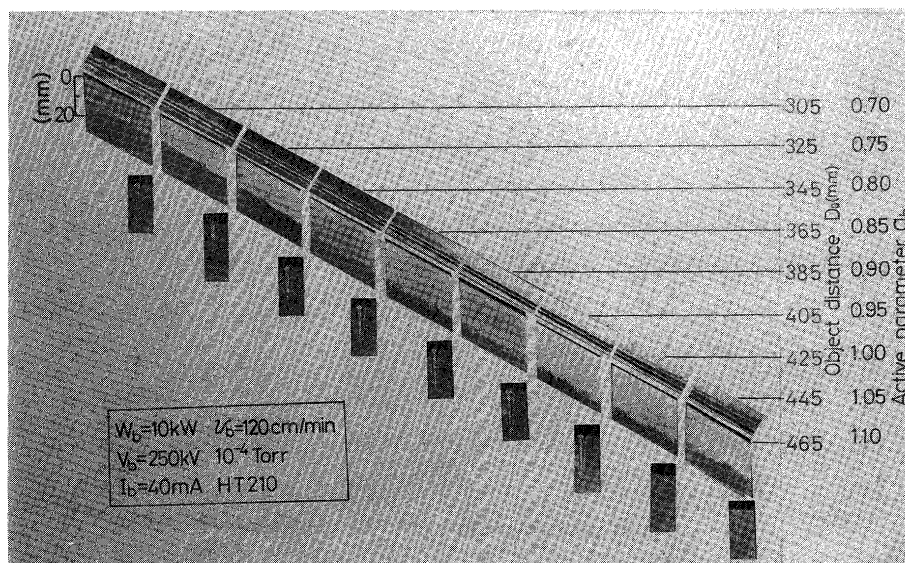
Partially penetrated bead cross sections and appearance of down slope welding.
